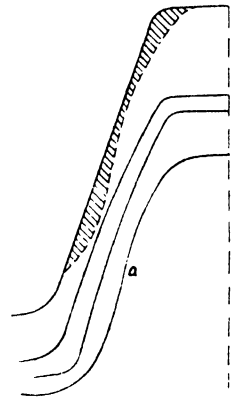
Tooth Forms of Up-to-date Mill Gears.
